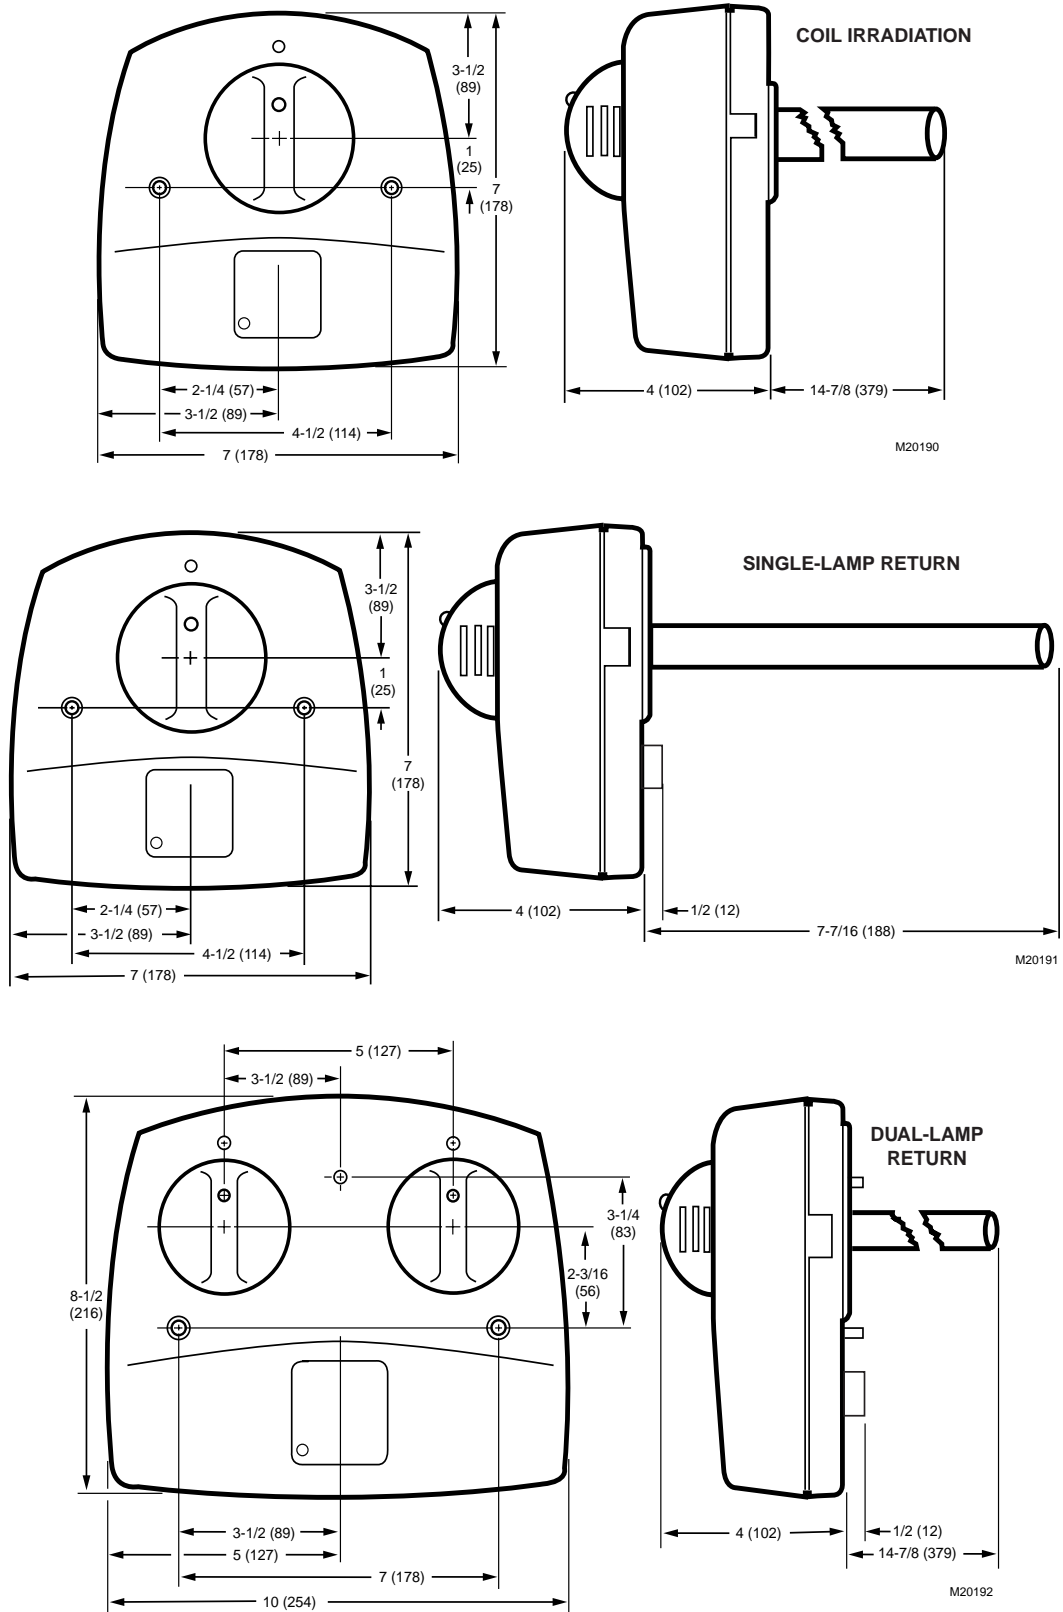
Ultraviolet Air Treatment System dimensions in in. (mm).
